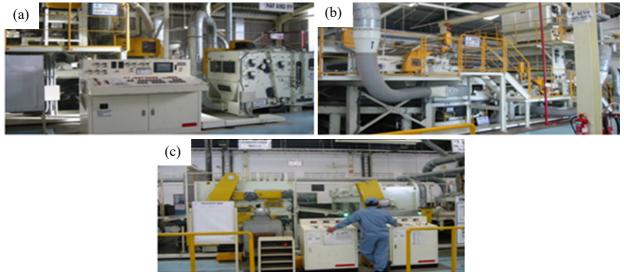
Manufacturing process of pre-board (a) opener machine, (b) forming machine, and (c) needle punch.
